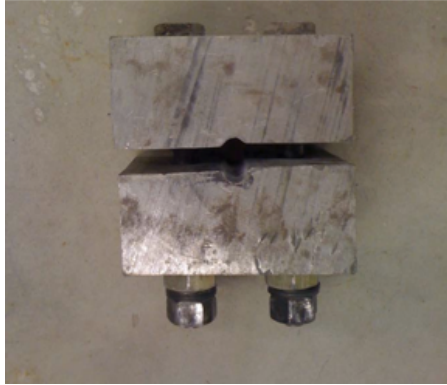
Views of steel grips used in pullout tests, clamping the bar from two opposite sides
